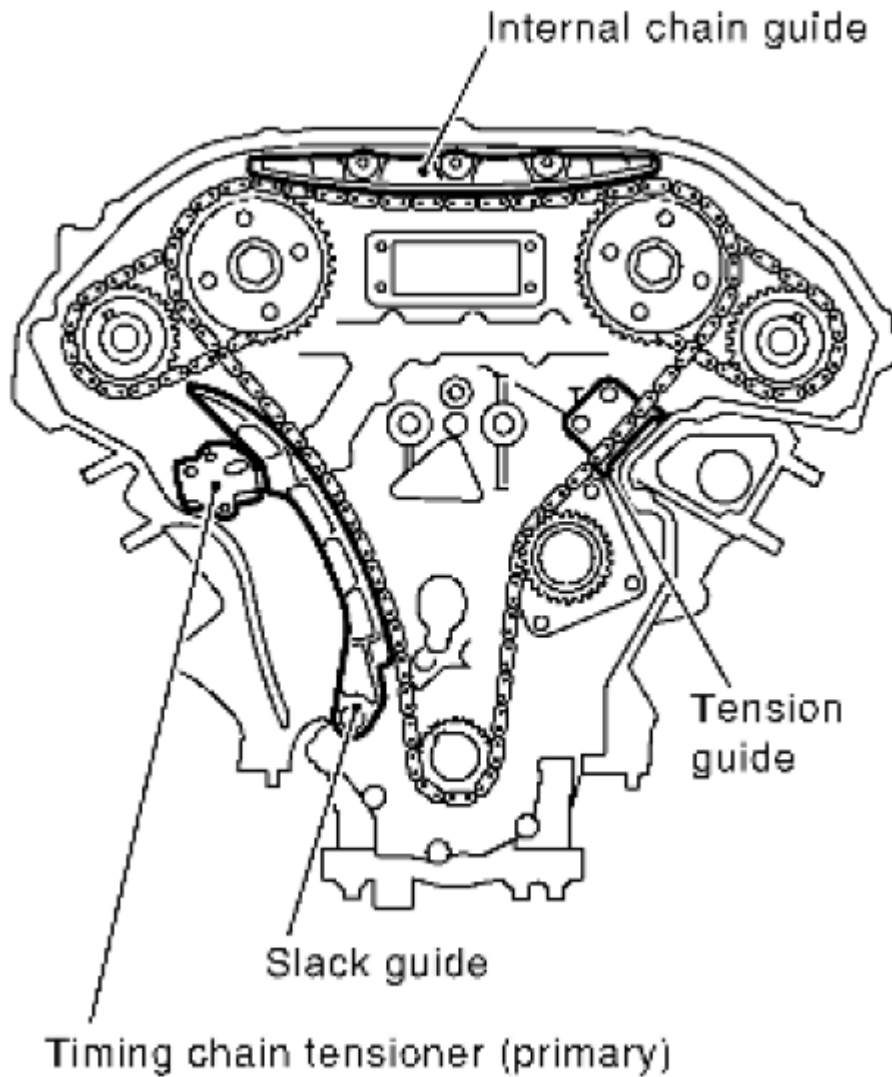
Identifying Internal Chain Guide, Slack Guide And Timing Chain Tensioner
